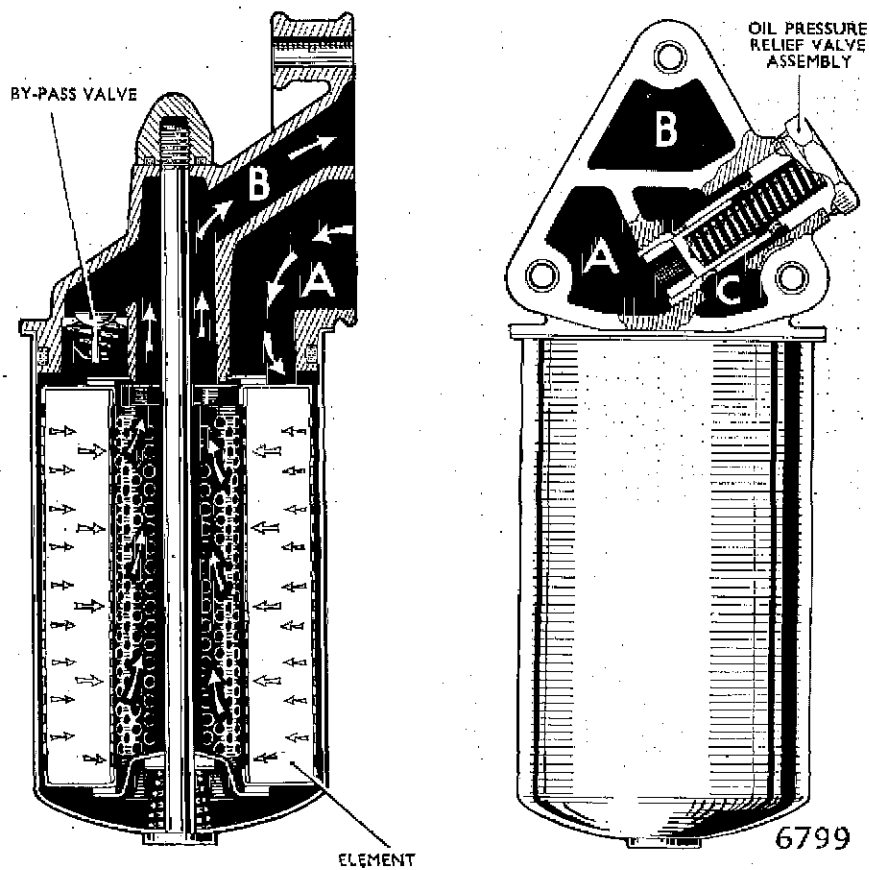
Oil filter—sectional views showing oil pressure-relief valve and by-pass valve
